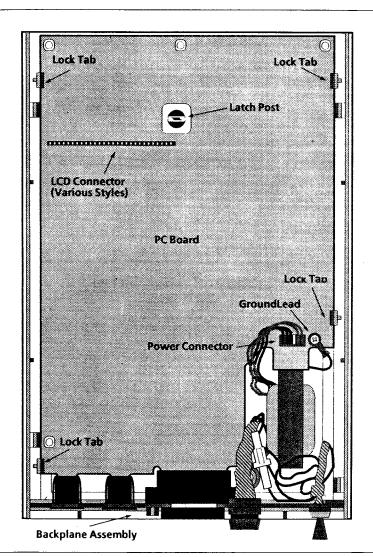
Location of PC Board Lock Tabs and Latch Post
